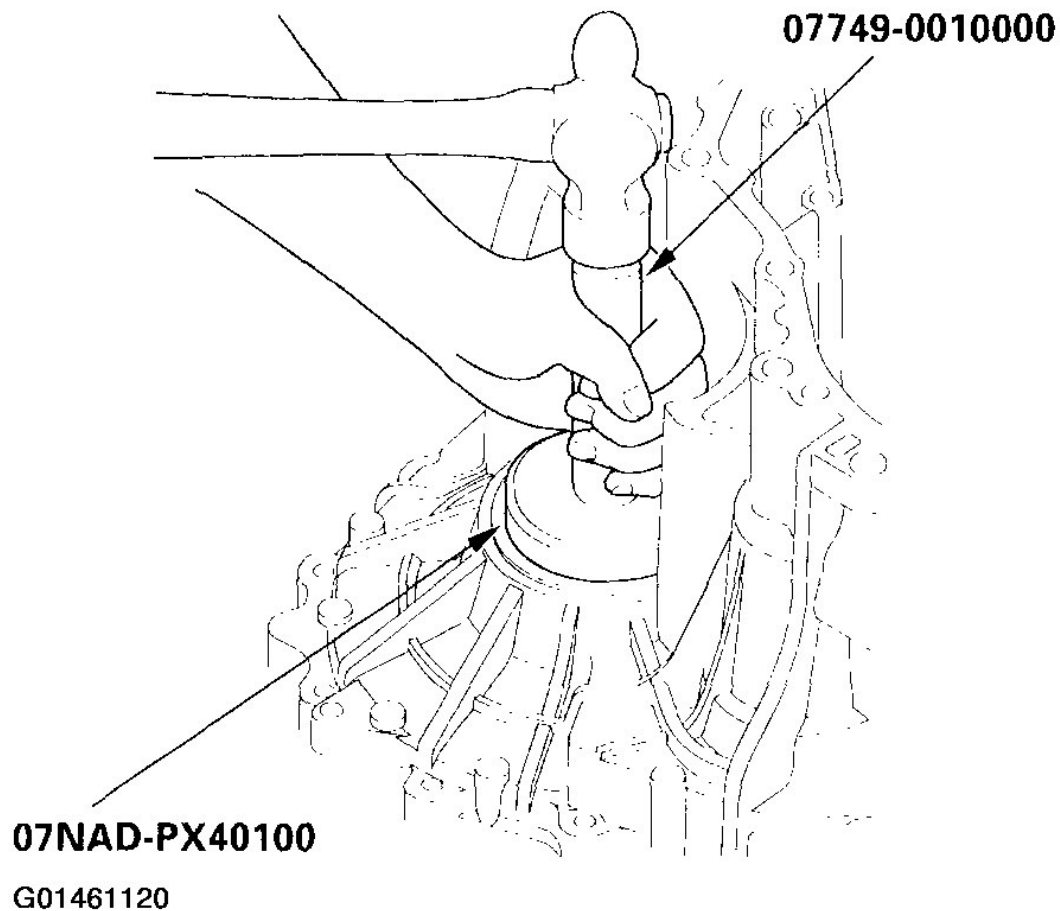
Installing New Oil Seal Flush With Transmission Housing With Special Tools
